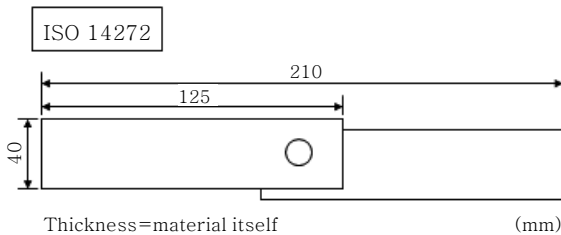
Schematic drawing of the specimen of spot welding joint (DP590; 1.4t, Al5052; 1.5t)
